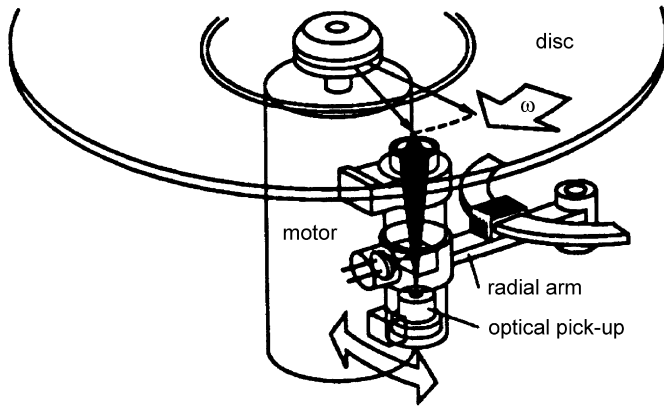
Schematic view of a rotating arm compact disc mechanism.
